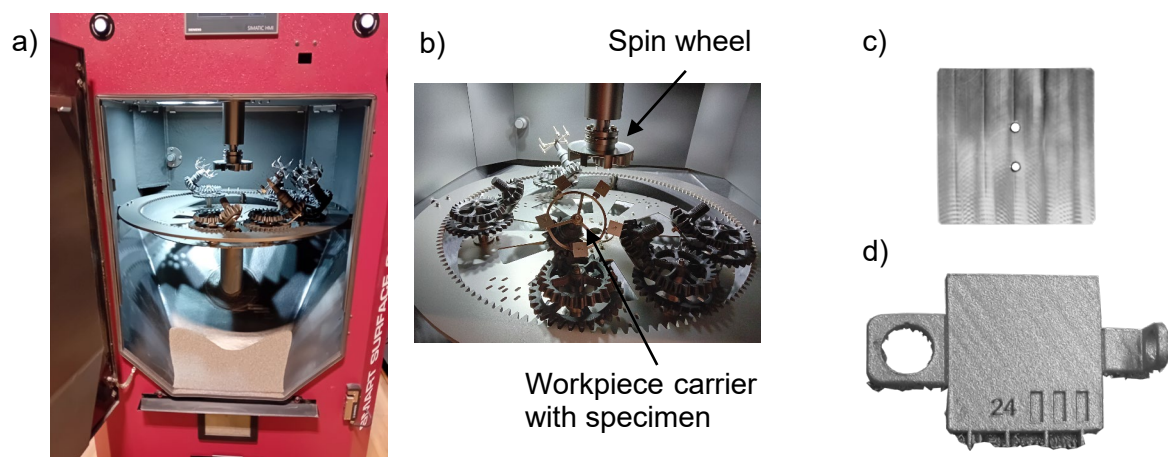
a) Wheel blast machine TWISTER, b) detail of the machine, c) milled specimen and d) additively manufactured specimen
